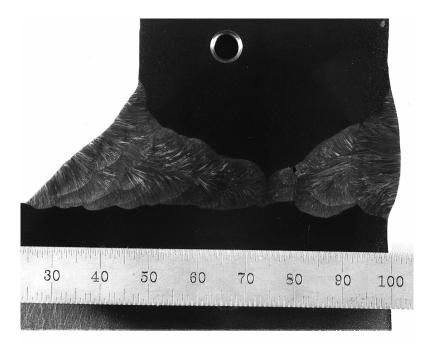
Cross section of Weld in Mockup BWRVIP-B
